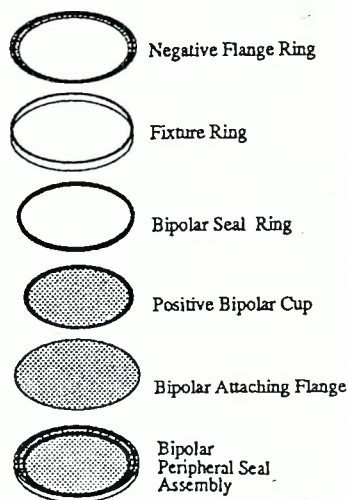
Exploded view of a bipolar peripheral seal along with an assembled component.
